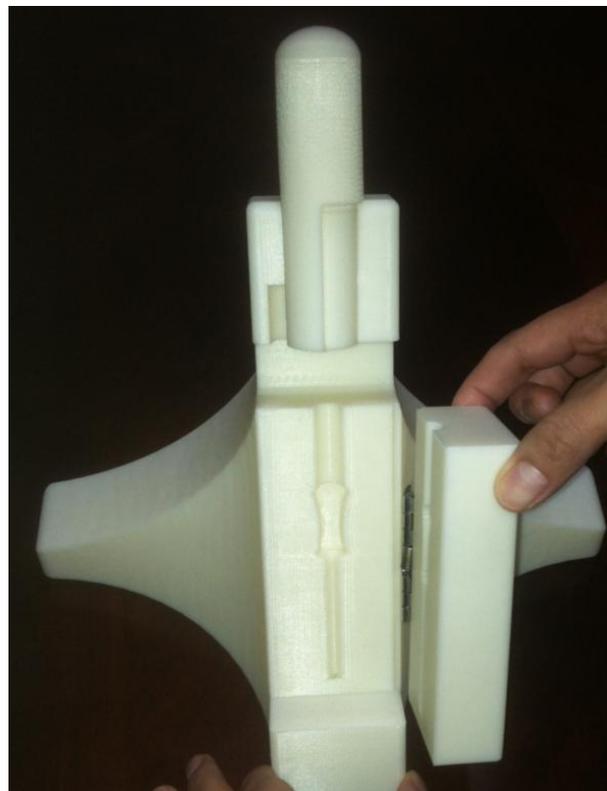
Physical Prototype of the Fisher Model Made Using a Rapid Prototyping Machine
